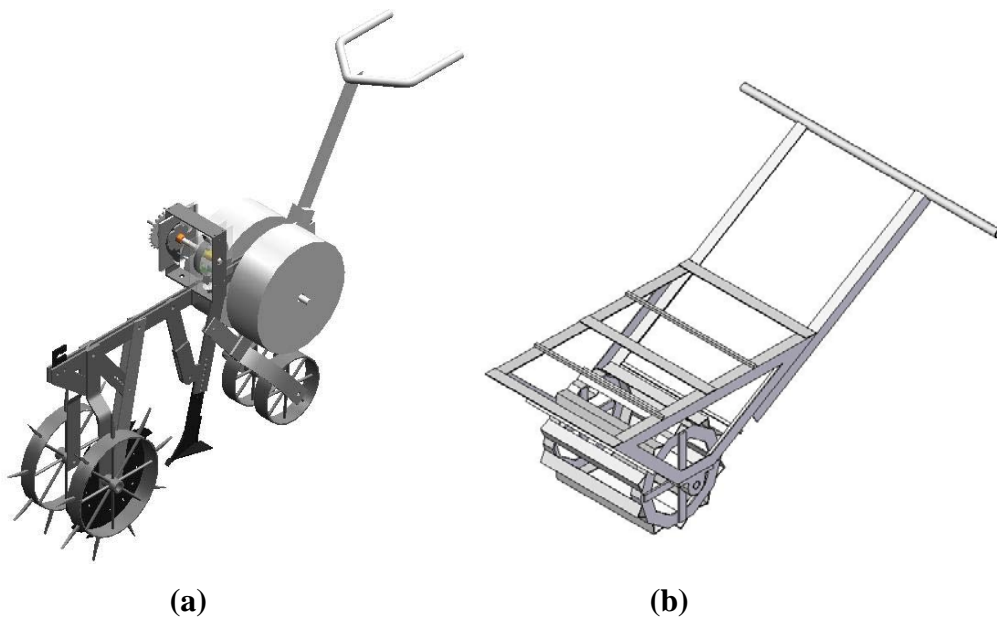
No-Till Equipment: (a) Drill and Planter; (b) Residue Roller
